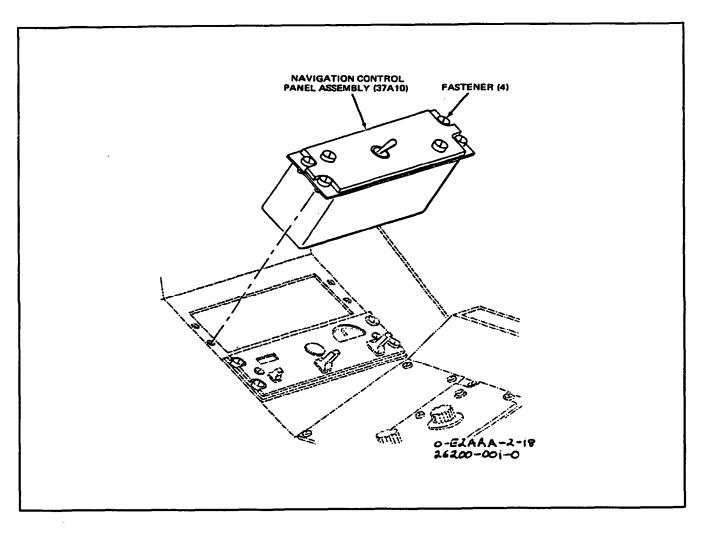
Removal and Installation of Navigation Control Panel Assembly
